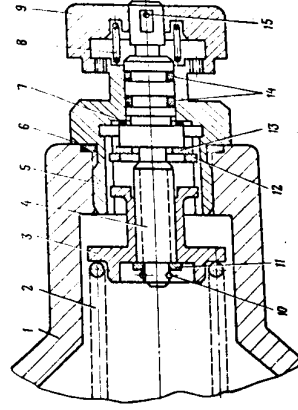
Adjusting Head of Acceleration and HP-10.KC Pump Starting Control Units
